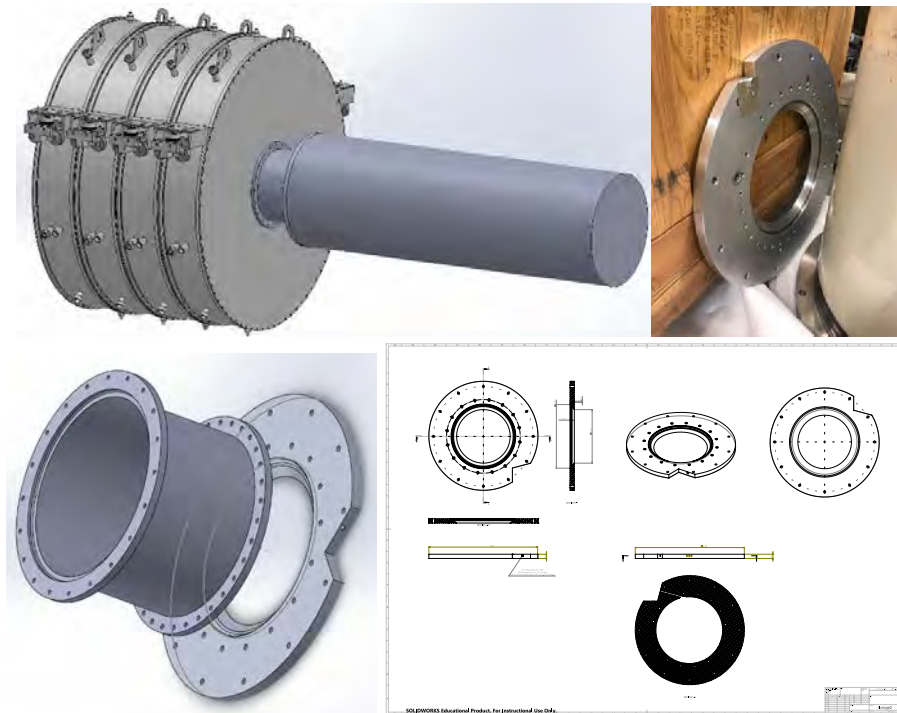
(upper left) SolidWorks model of the brazed MILO mounted to the 4-cavity BLUE facility. (upper right) The flange fabricated for mounting the MILO to BLUE. (lower images) SolidWorks model (left) and engineering drawing (right) of the mounting flange. The slot cut in the flange allows a Rogowski coil to be fielded for measuring the total current delivered to the MILO. The flange was designed and procured by PhD student Alexander Mazarakis.
